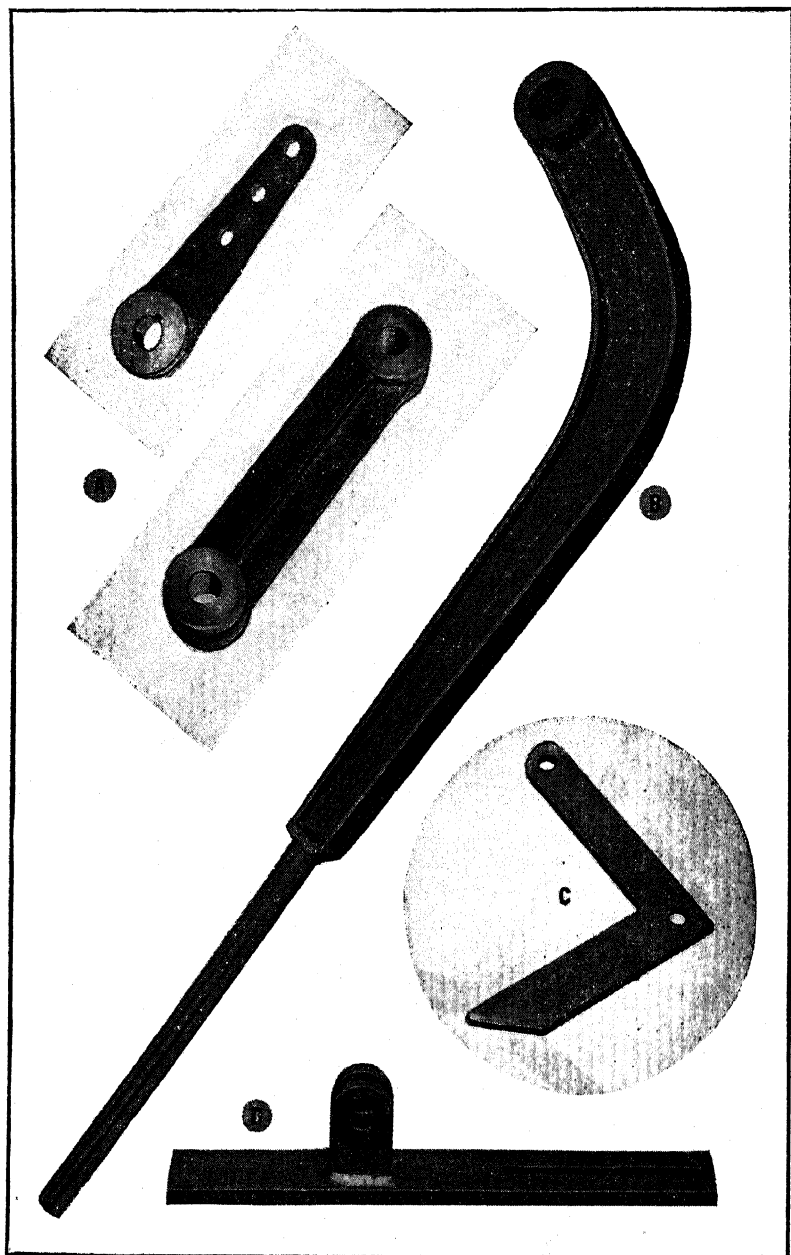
LEVERS—(A) Levers for industrial furnace. (B) Handle for paper cutting machine. (C), (D) Levers for wire reel.
